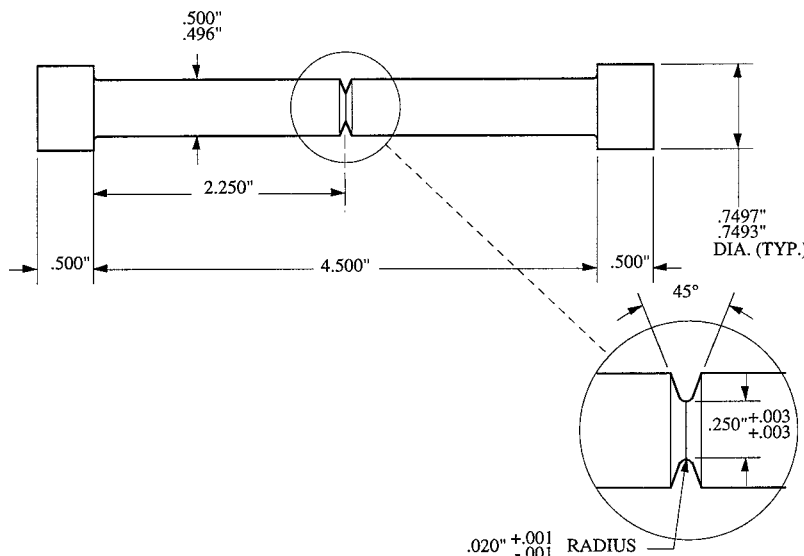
Engineering drawing of the notched round bar (NRB) specimen
